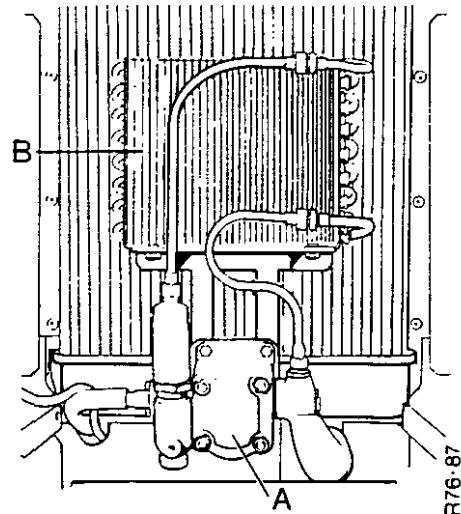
SINGLE HYDRAULIC PUMP AND HYDRAULIC OIL COOLER
